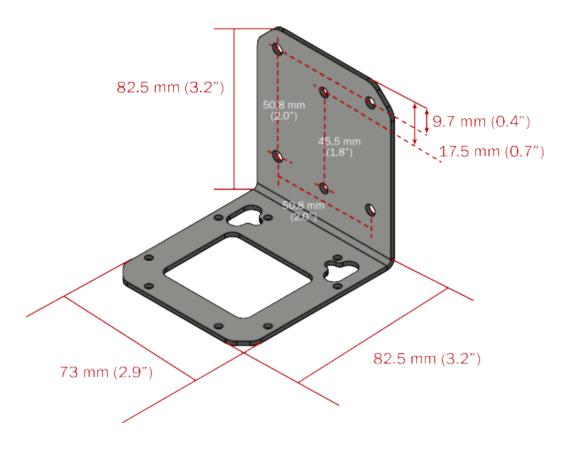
CRA-WMB4 Wall Mount Bracket Dimensions
